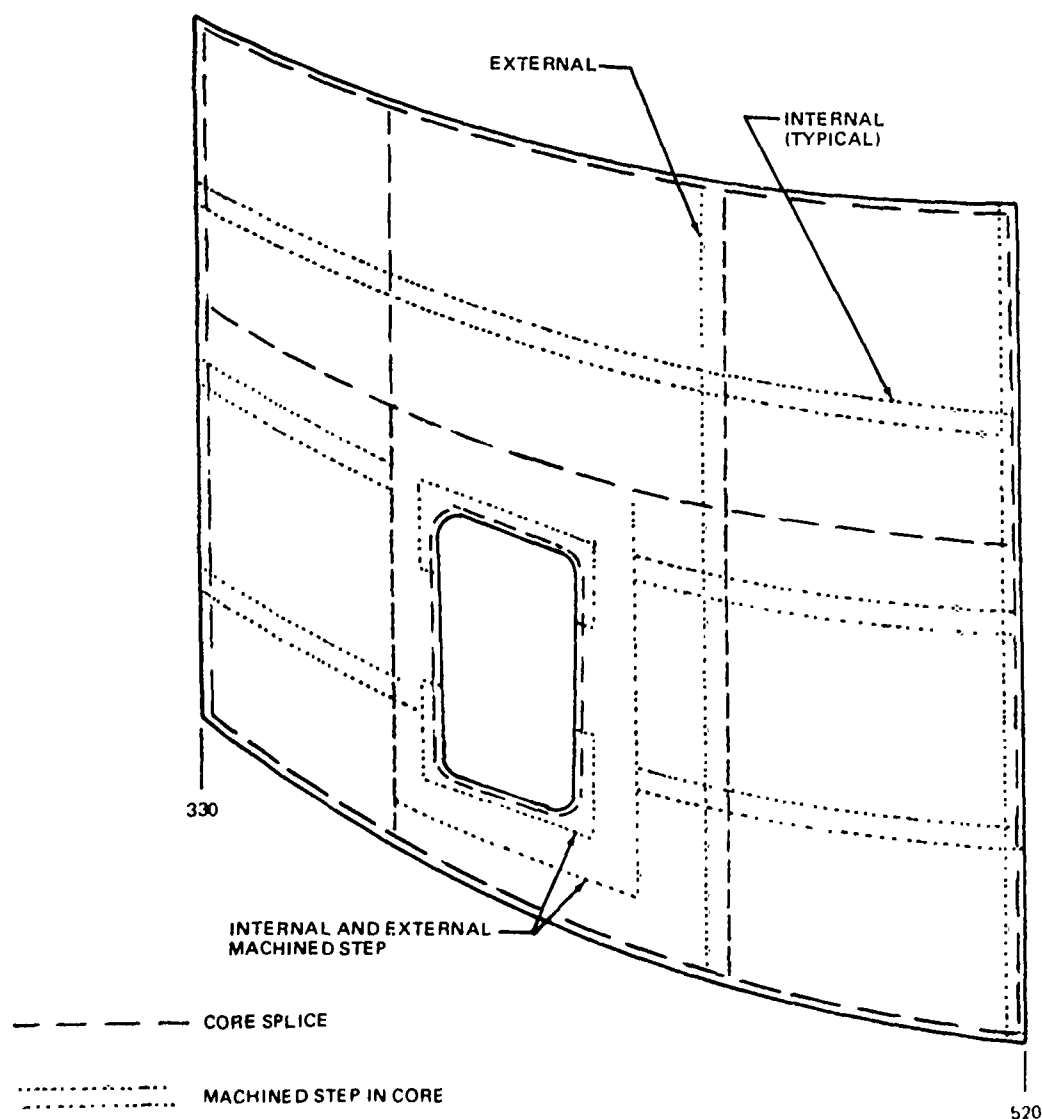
HONEYCOMB - TYPICAL CORE SPLICES AND MACHINED STEPS
